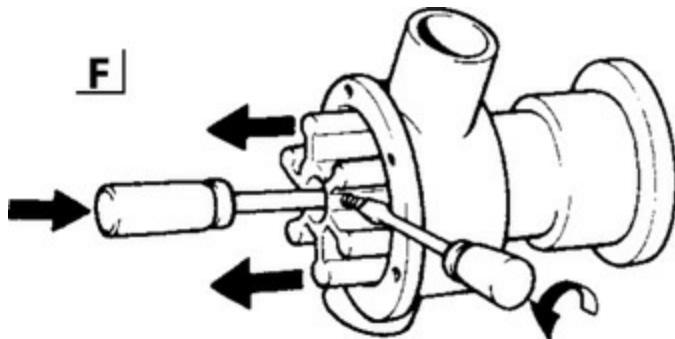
D. Using two screwdrivers to dig out an impeller. (Jim Sollers)
